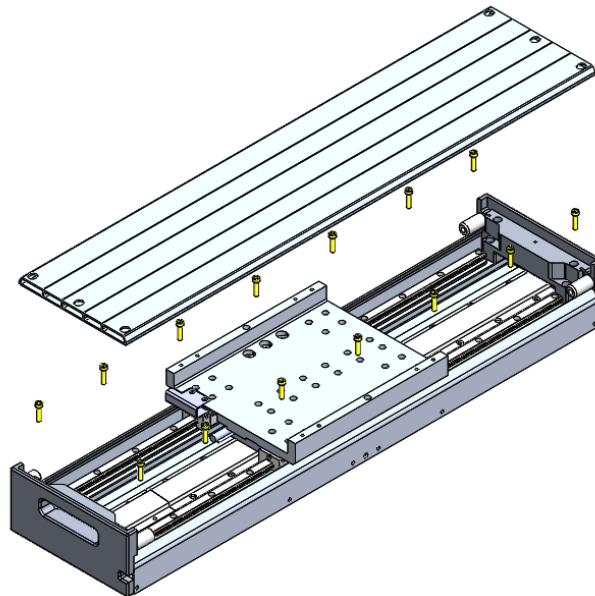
Assembling the linear motor system – here for an LMSSA linear motor system
